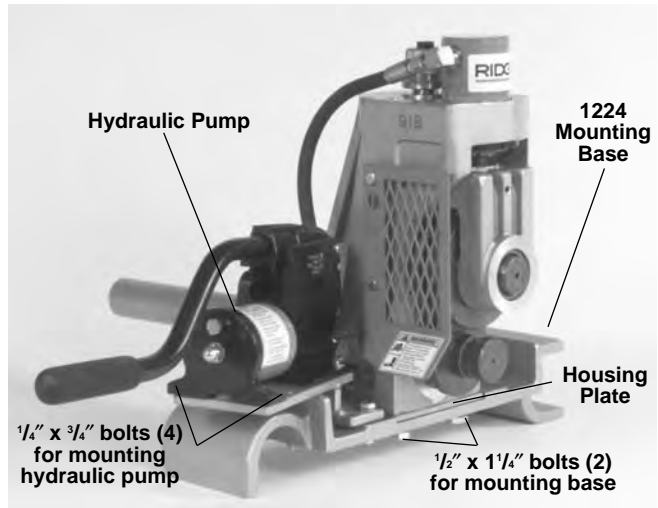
918 Heavy Duty Roll Groover on 1224 Threading Machine Mounting Base
